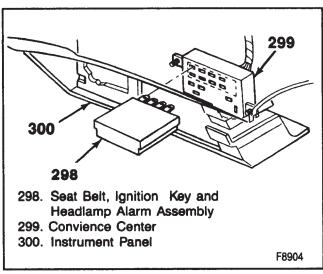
Seat Belt, Ignition Key, and Headlamp Alarm Assembly
